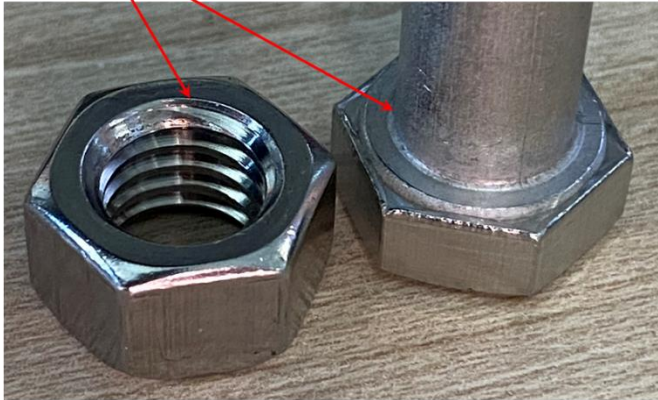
The bolt pretension is concentrated at the bolt and nut bearing surfaces, resulting in high contact stress.
